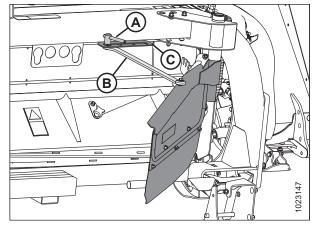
Forming Shield Side Deflector and Adjuster Bar
